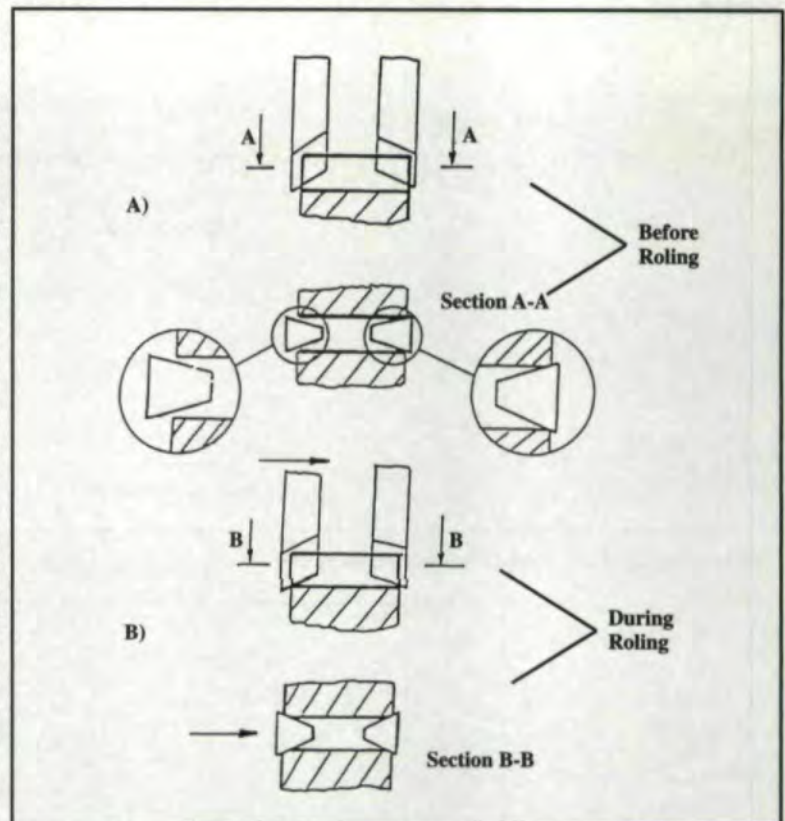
A) Nonsymmetrical chamfer tools; B) Symmetrical chamfer tools.
